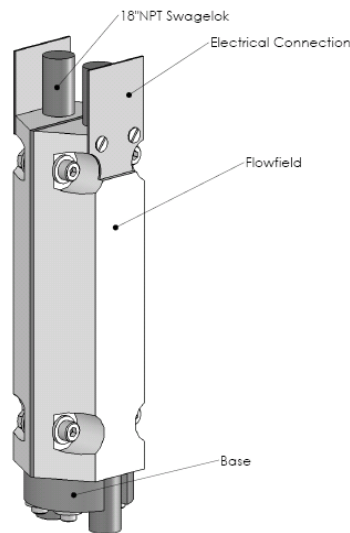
CAD Drawing of NCT fuel cell acquired for testing.
